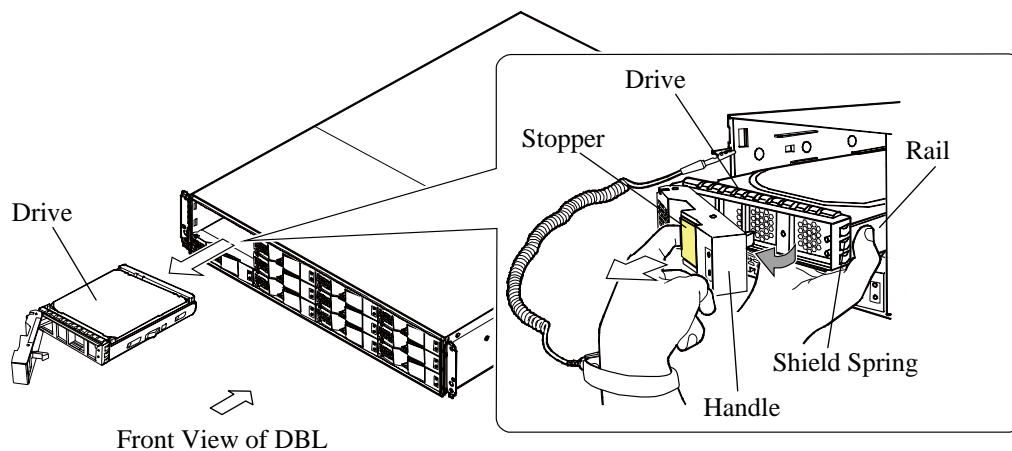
Removal of Drive (for DBL)
